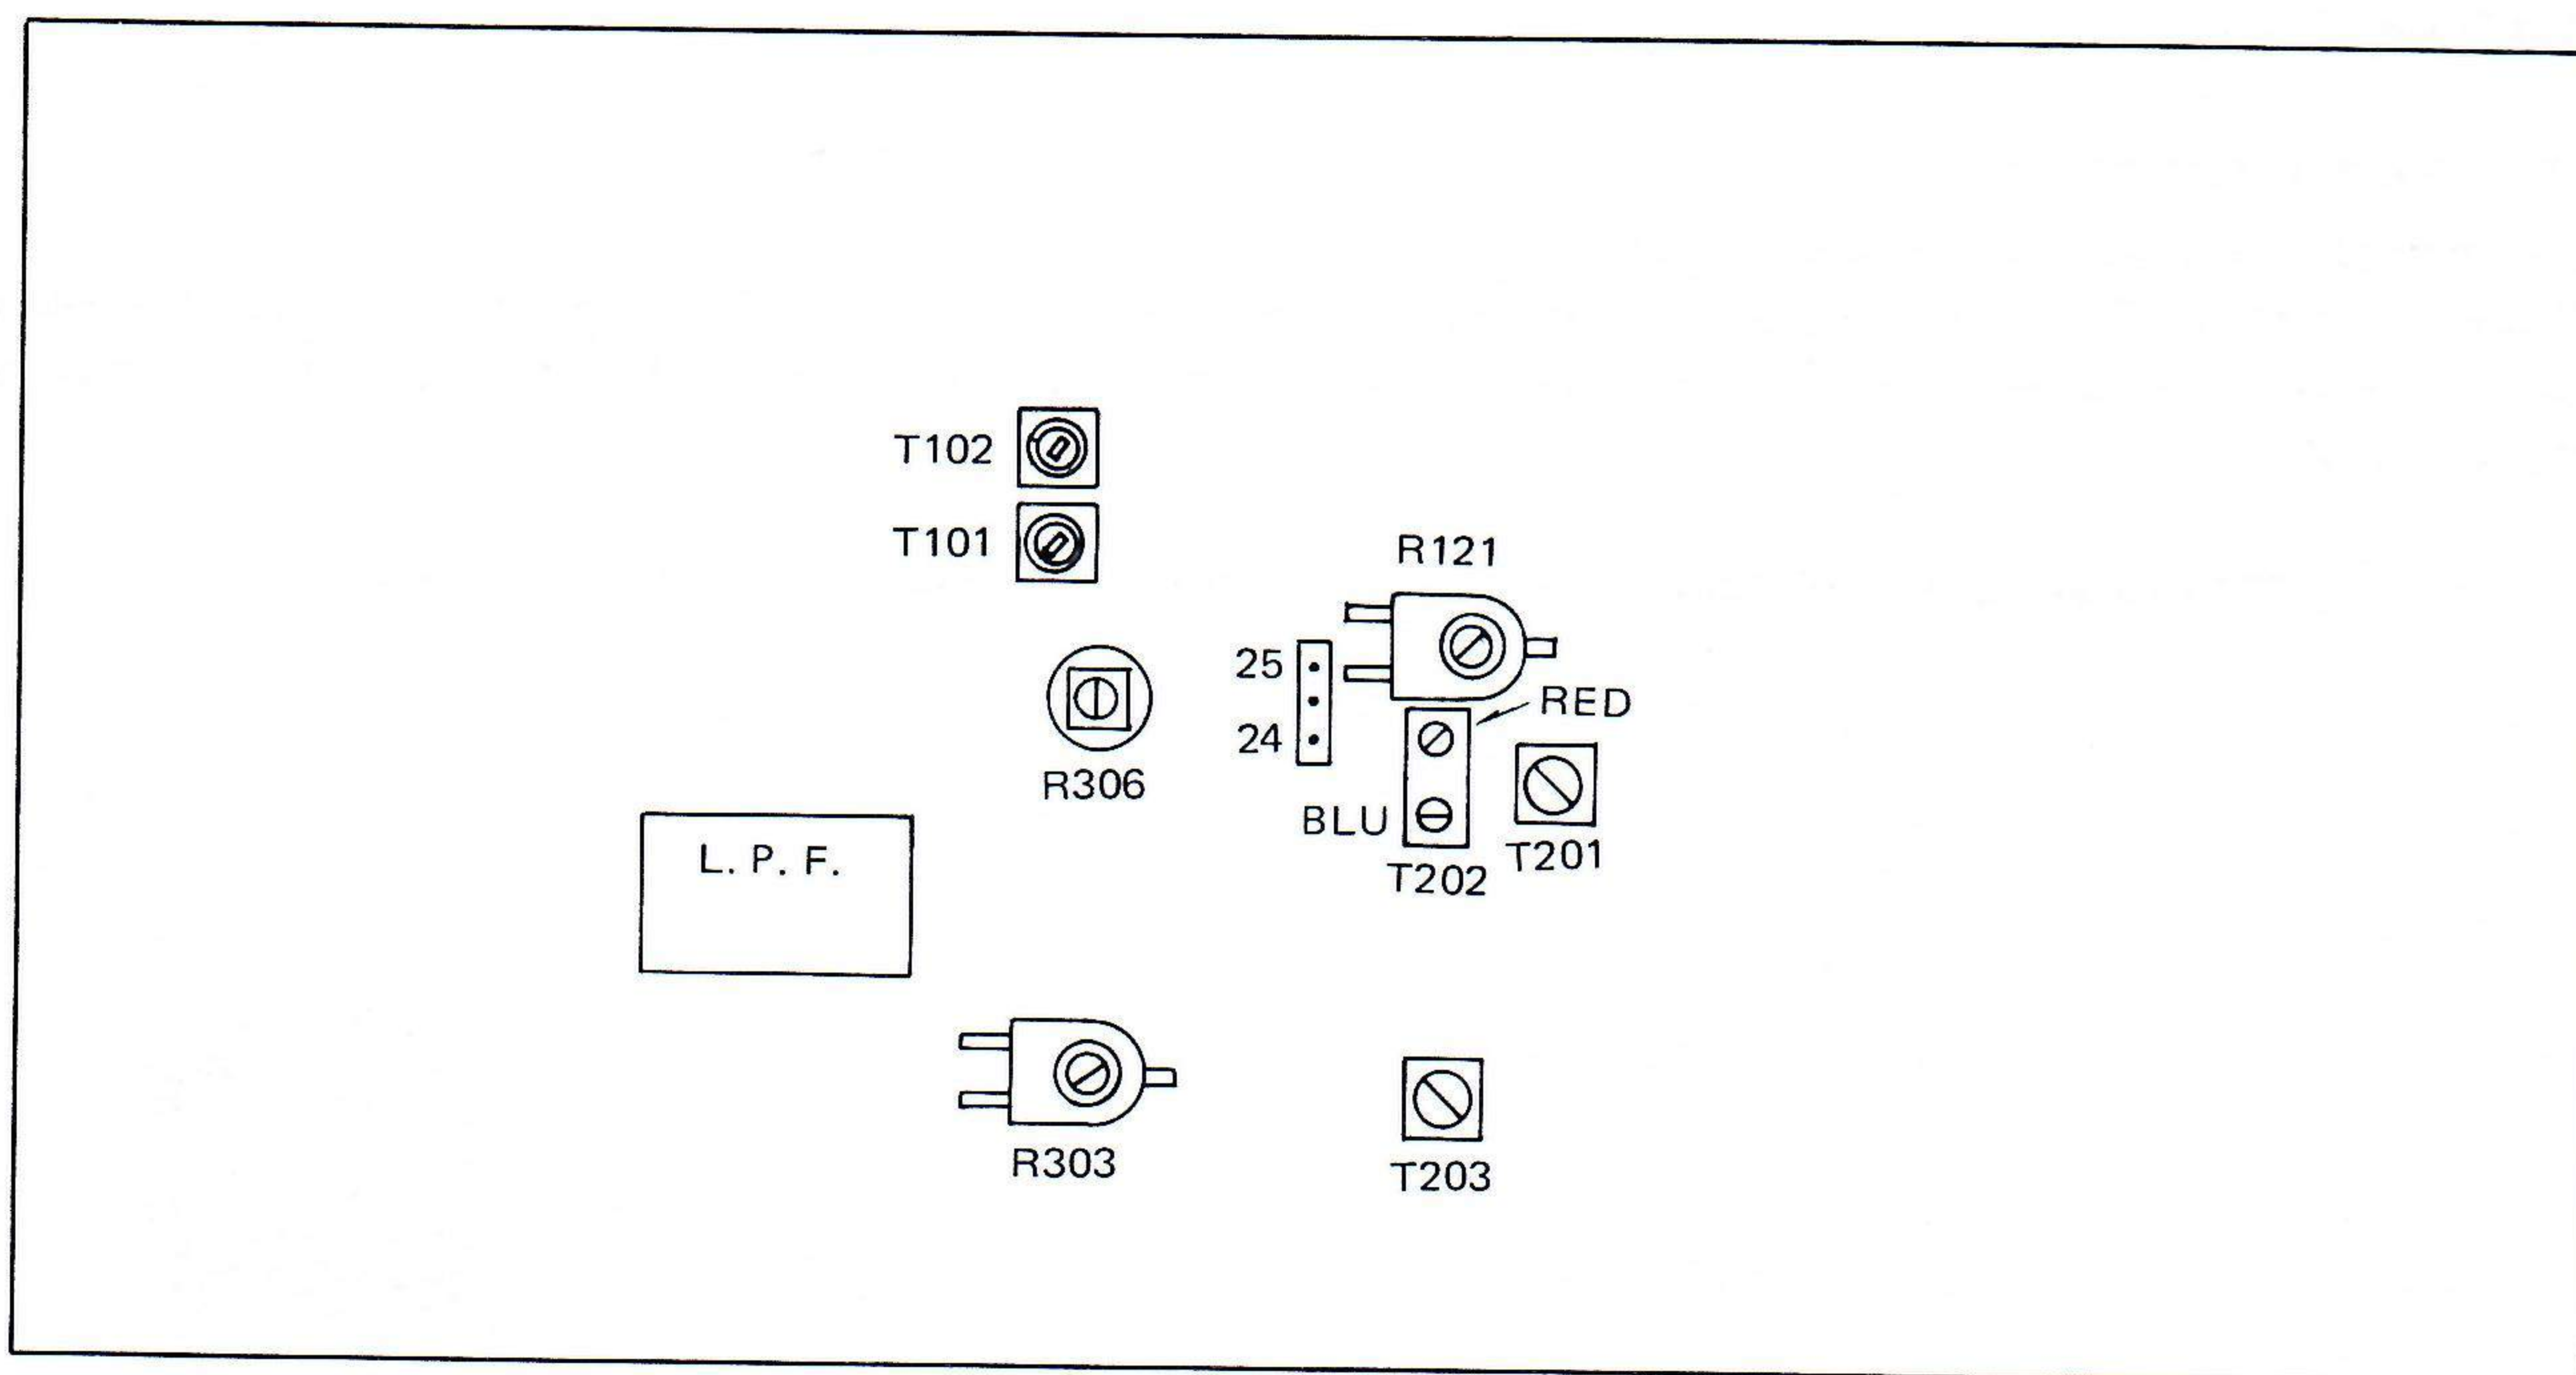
TUNER/EQUALIZER PCB (TOP VIEW)
